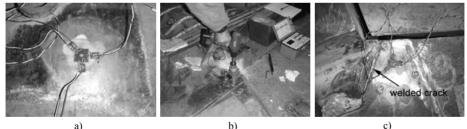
Illustrative pictures from application of hole-drilling method. a) Applied strain-gage for hole-drilling, b) Hole-drilling, c) Localization of the strain-gage near welded crack
